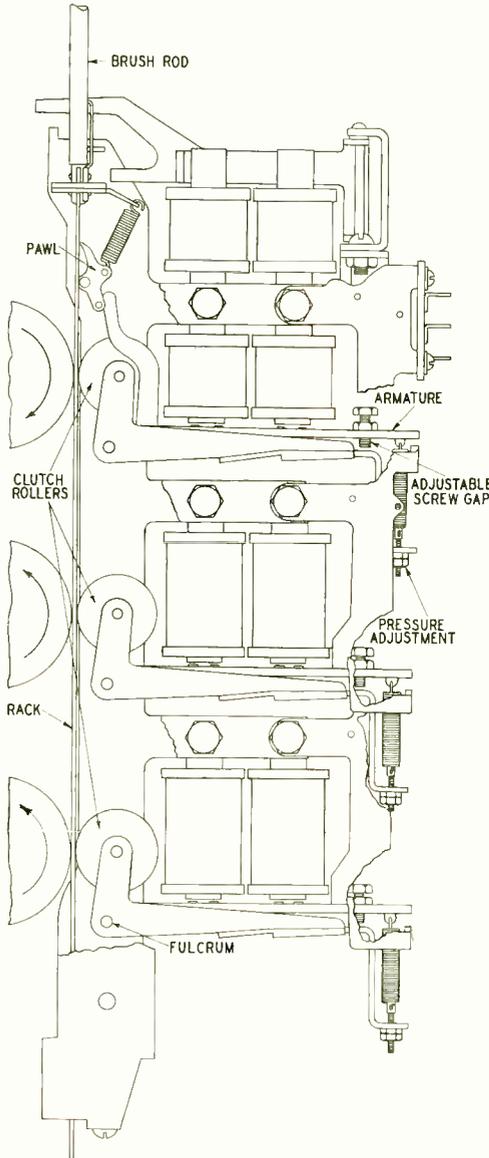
A diagrammatic view of a four magnet clutch assembly shows the essential operating elements
